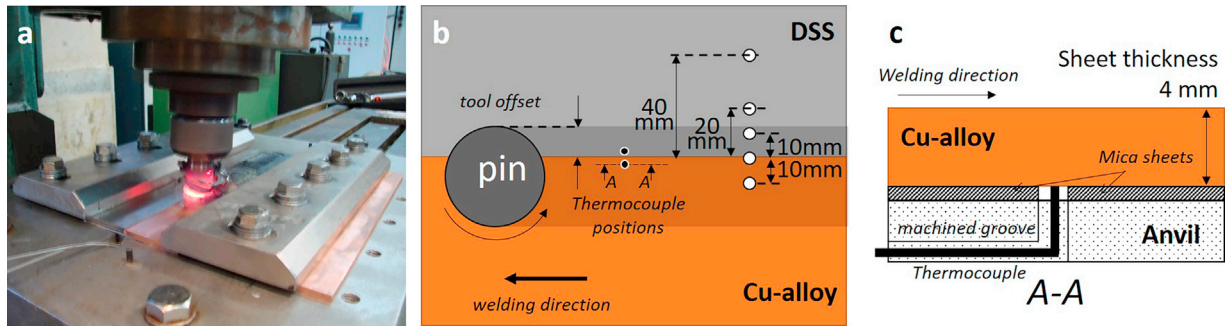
(a) welding setup, (b) position of thermocouples and strain-gauges (c) side view cross-section showing the relative position of the thermocouples.
